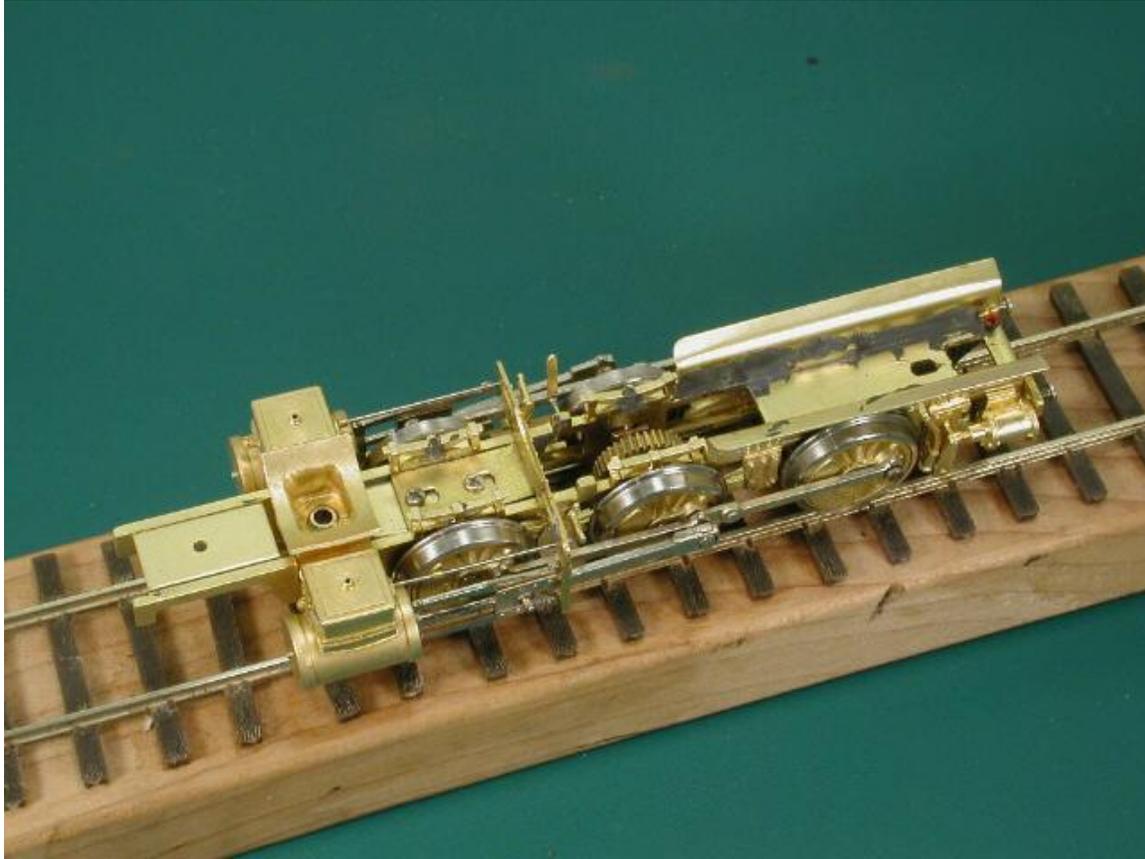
Use your polishing stick and polish both the frame and driver bearing surfaces for a smooth fit. As you discovered when disassembling the locomotive, you now have three driver sets, six retaining plates and twelve 1.0 mm screws to reattach. Take your time! I put a very small drop of ACC in the dimple of each axle bearing and using a non-magnetic pair of tweezers, placed the driver spring on the bearing and let it set up for a few minutes before installing the driver. With all three driver sets installed, roll the frame back and forth on a piece of track to check for binds. Install the side rods for the second and third driver sets, and again test the rolling quality. Then install the side rods for the first and second driver sets and do the same. Any drivers out of quarter or siderod binds should be identified, and corrected. Install the cylinder chest, valve gear hanger, and main rods. Examine for clearance between the front drivers, cylinders and other moving parts of the mechanism. Adjust as necessary. Even though we haven't applied any lubricant yet, our mechanism should roll smoothly and without binds. Note on the rear right hand side of the mechanism the 1.4 mm grounding screw, which is painted red for clarity.
